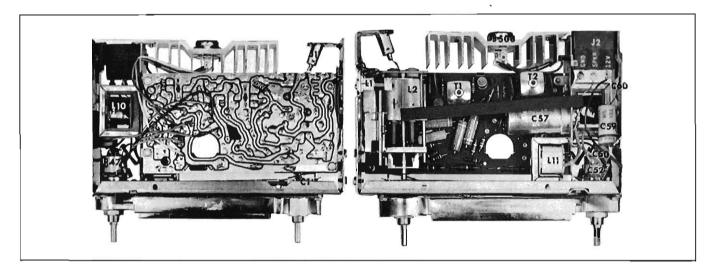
CHEVROLET TRUCK - PARTS LAYOUT - CIRCUIT BOARD VIEW - 986338 - RADIO
